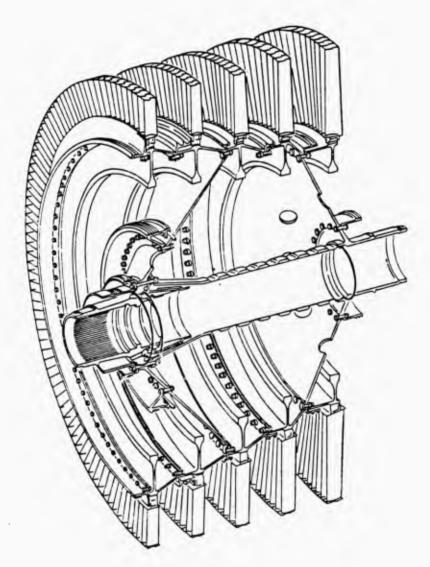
Low pressure turbine assembly of a CF6-6 engine (courtesy of General Electric Corporation).
